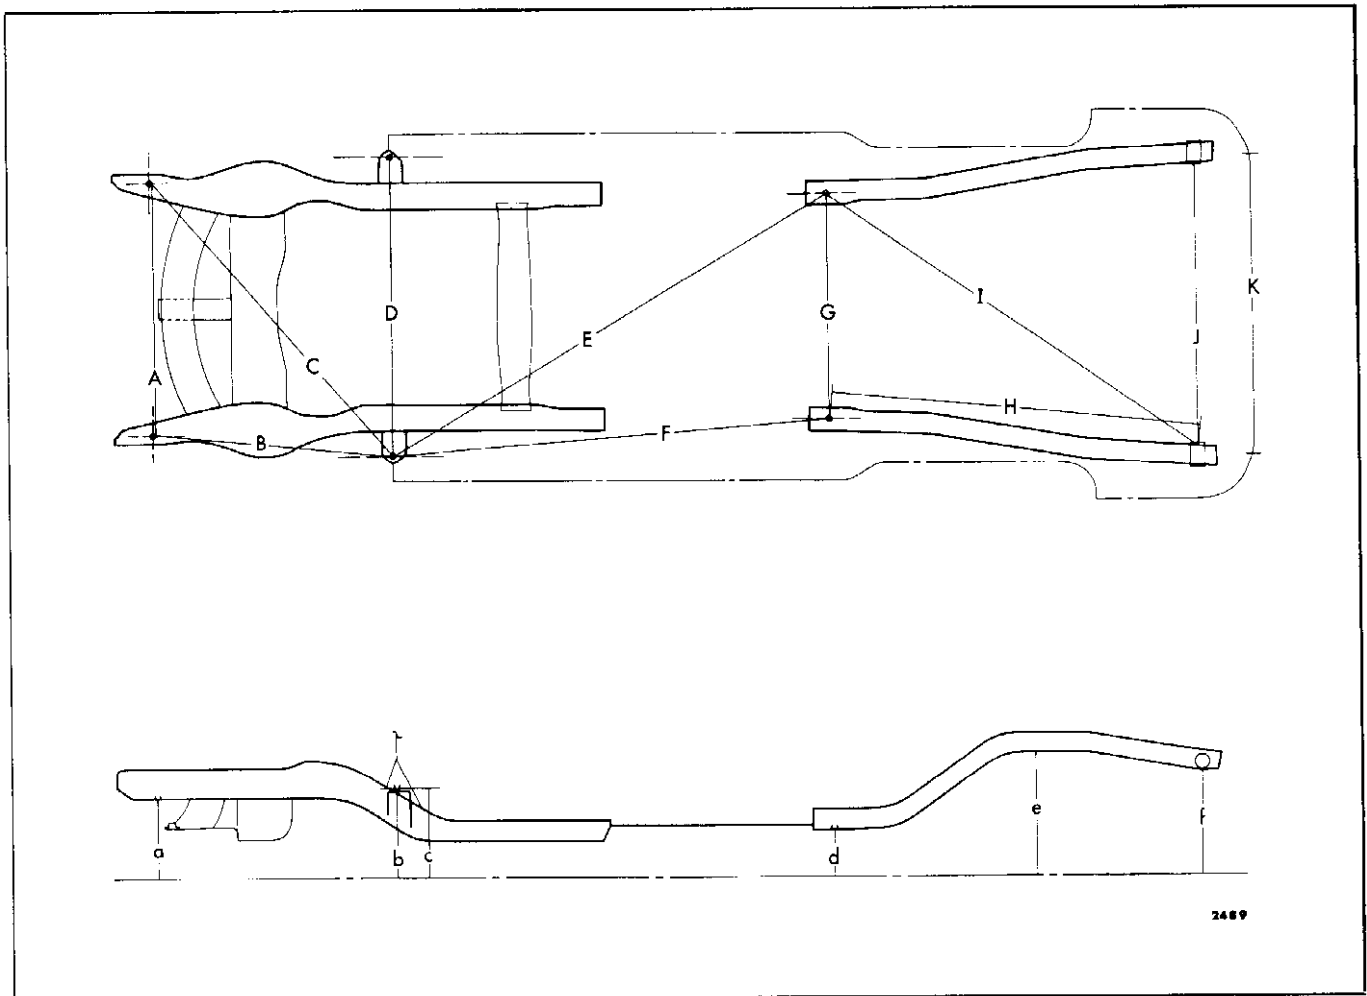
Horizontal and Vertical Checking Dimensions
